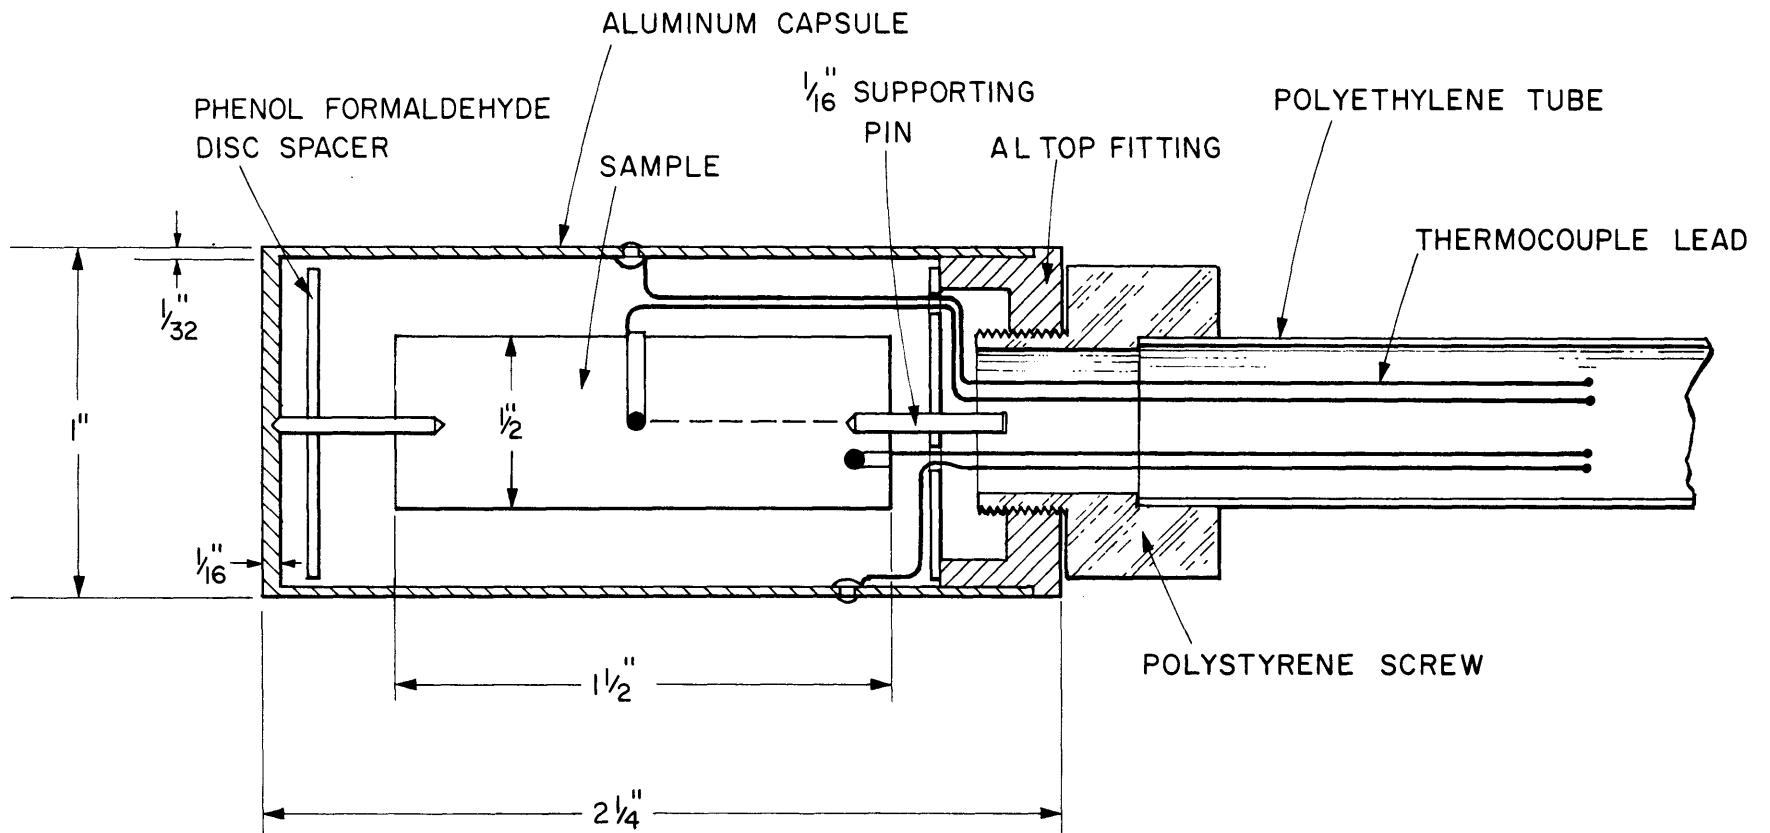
ASSEMBLY DRAWING OF A MODEL C CALORIMETER
